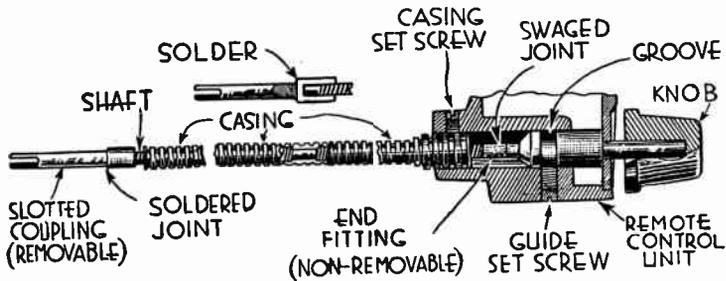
Construction at "Dental Cable" Flexible Control Shaft.
